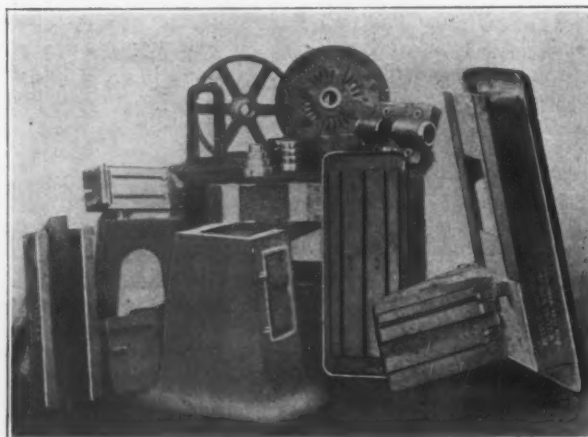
No. 7 Plain Milling Machine Castings Complete, All Made on the Molding Machine.
